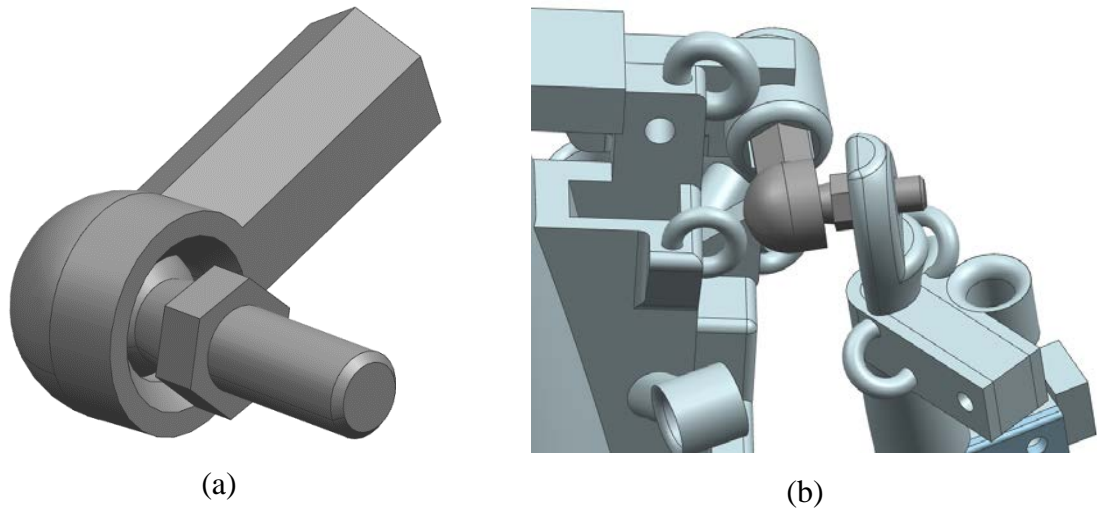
Configuration of the left shoulder. (a) angle joint; (b) connections of shoulder joint.
